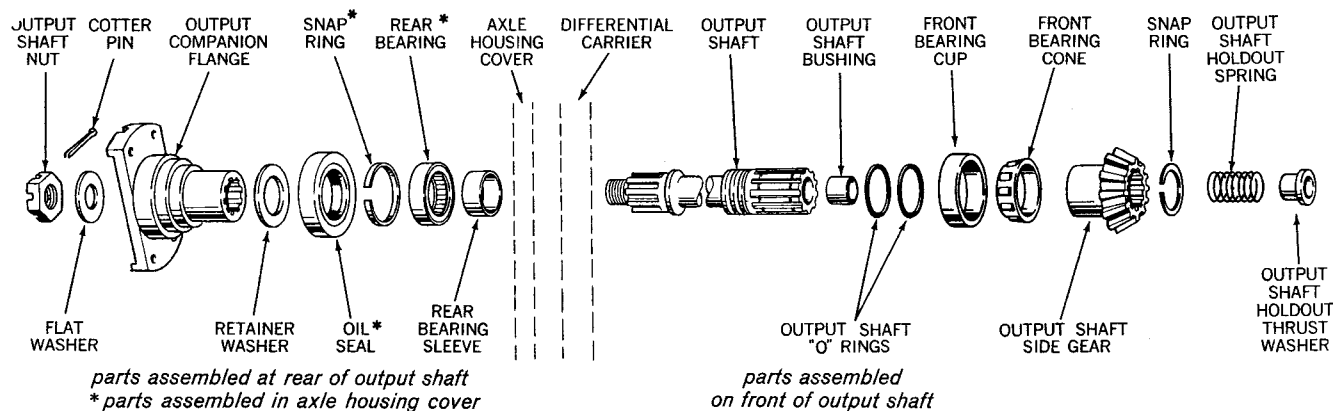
Exploded View of Output Shaft and Axle Housing Cover Parts
